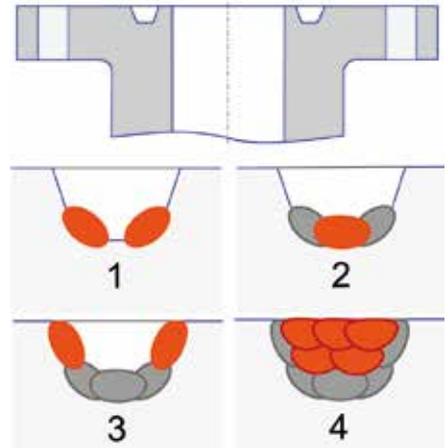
• Scheme of a flange to be sealed with a metallic joint and schematic drawing illustrating the principle of groove filling.
